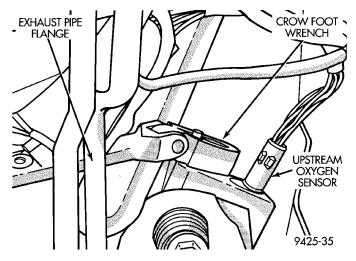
Upstream Heated Oxygen Sensor Removal/ Installation
